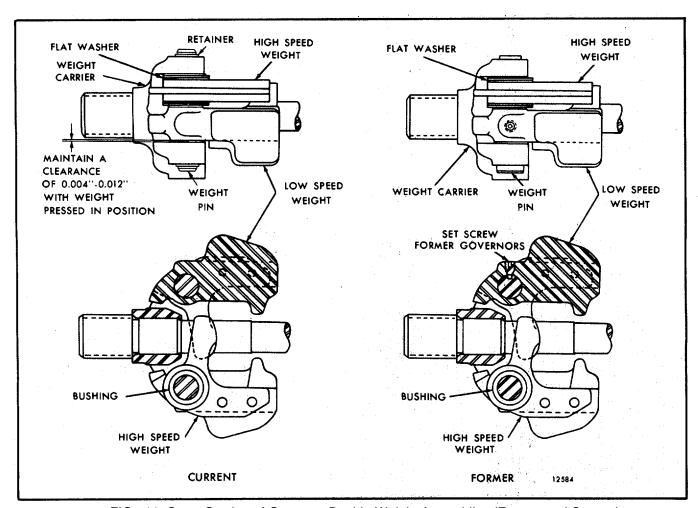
Cross Section of Governor Double Weight Assemblies (Former and Current)
